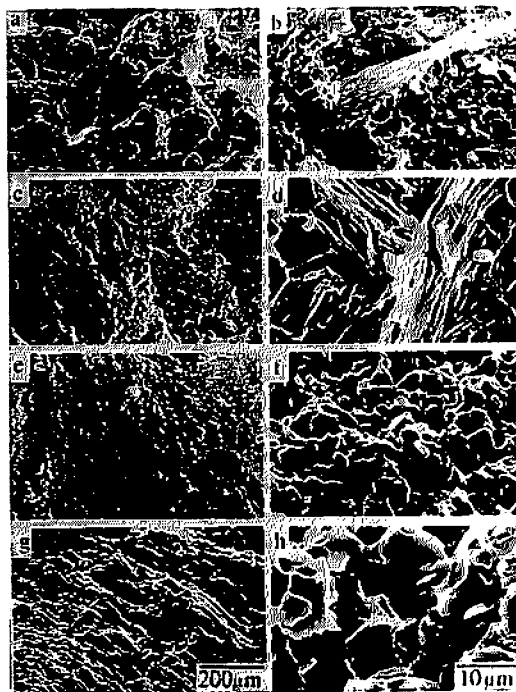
Fracture surfaces of as-compacted and heat-treated TiAl compacts
